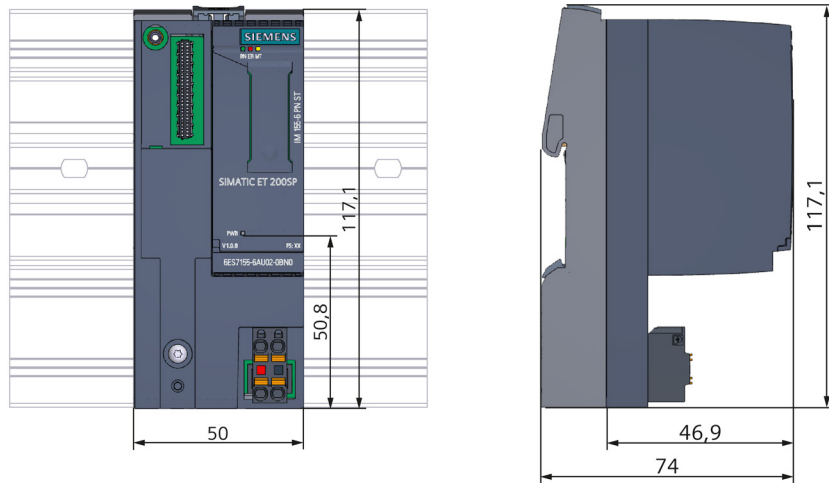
Dimension drawing of the IM 155-6 PN ST interface module (front and side view)
